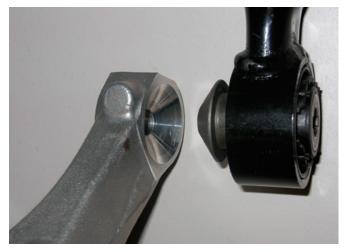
Close-up view, before assembly, of the toe-link (black) and the rear knuckle (silver) using a conical joint.
